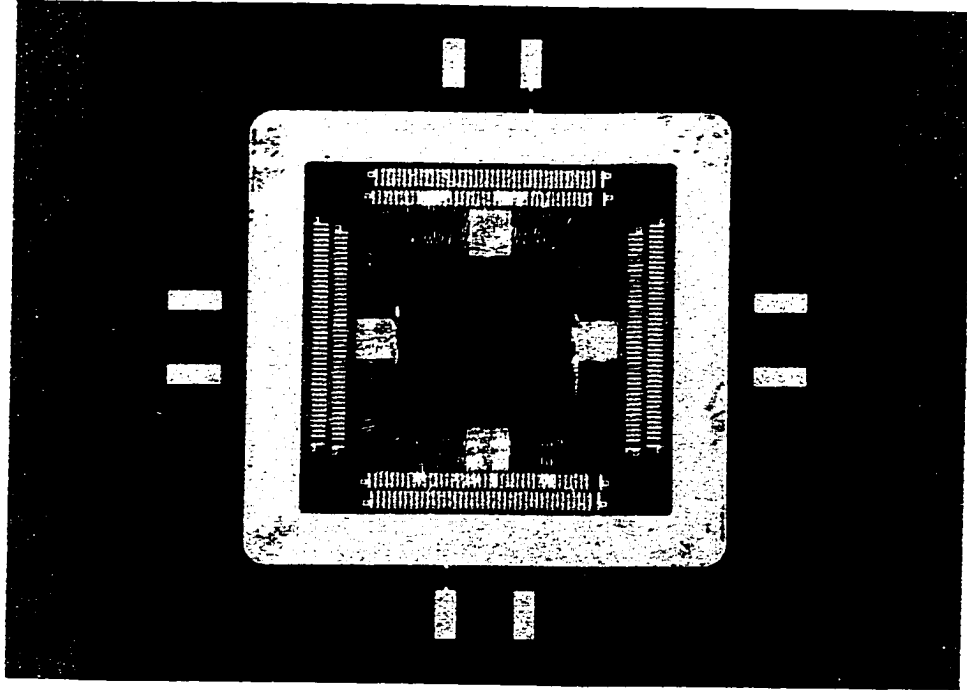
Typical Ceramic 281-pin PGA Package with Attached Test Chip
